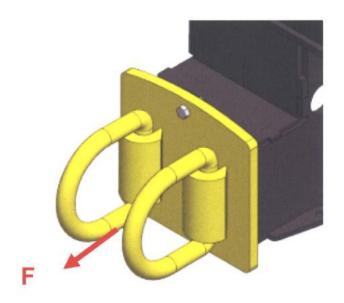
anchor device type attachment eyelet, mounted at steel construction and indicating the direction of the force applied
